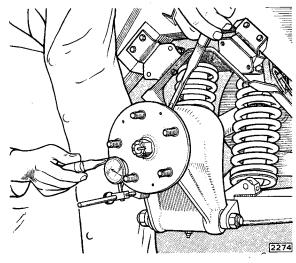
Checking the hub bearing end-float when in position (Churchill Tool No. J.13).
